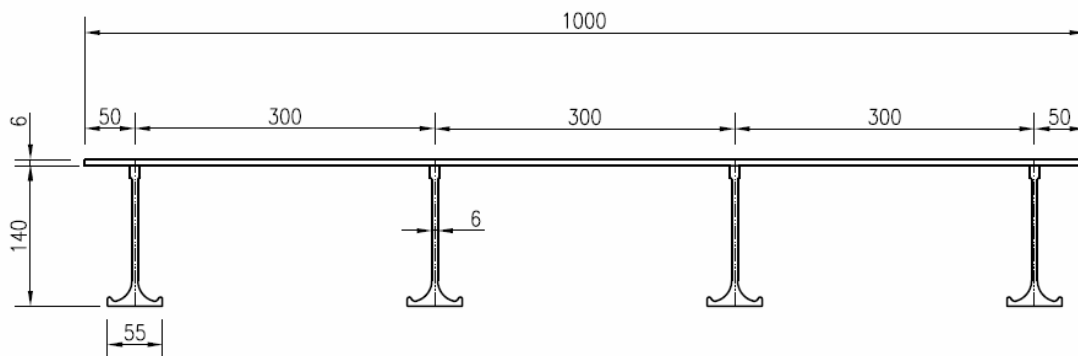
(b) Layout of test structure 20A for fillet-type fusion weld in mm
